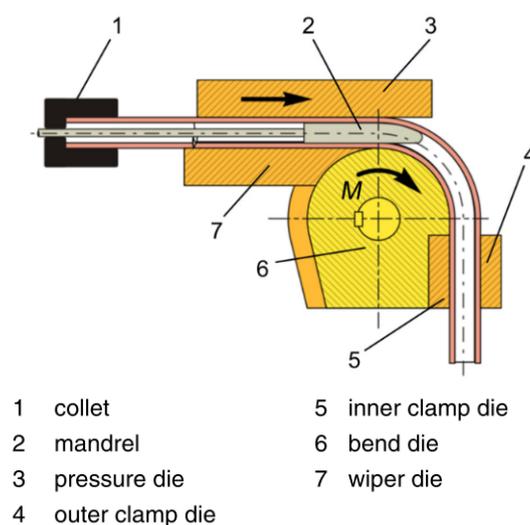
Tool components for rotary draw bending processes (VDI 3430, 2014)
